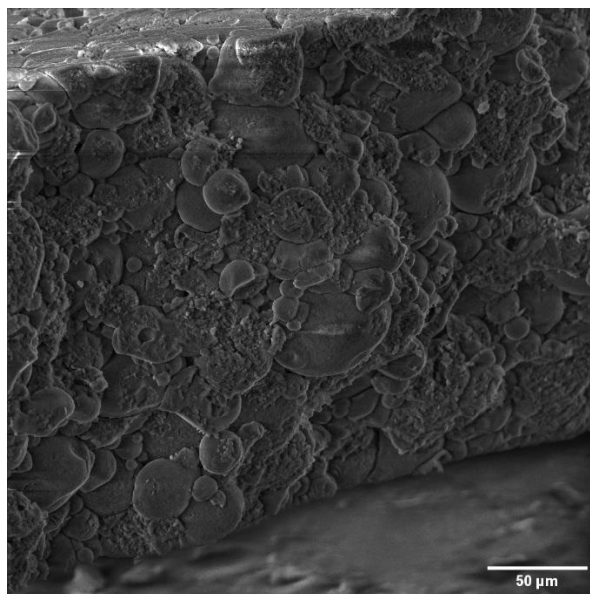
Surface of coupon from Trial 4 that was compressed using roller
